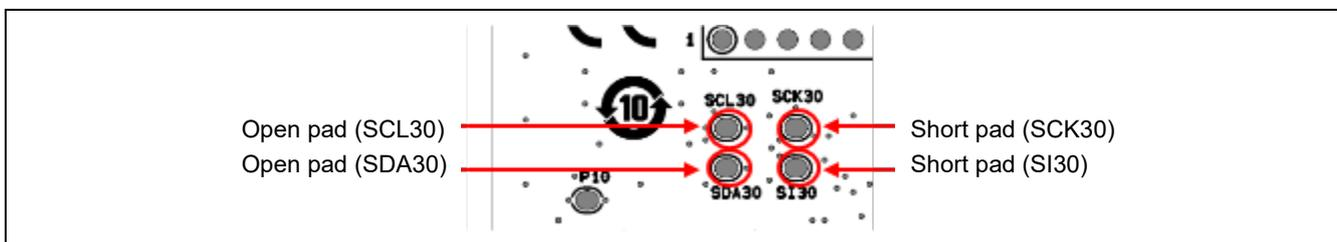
Positions of Open and Short Pads (Pmod™ 1) (Soldered Side)
